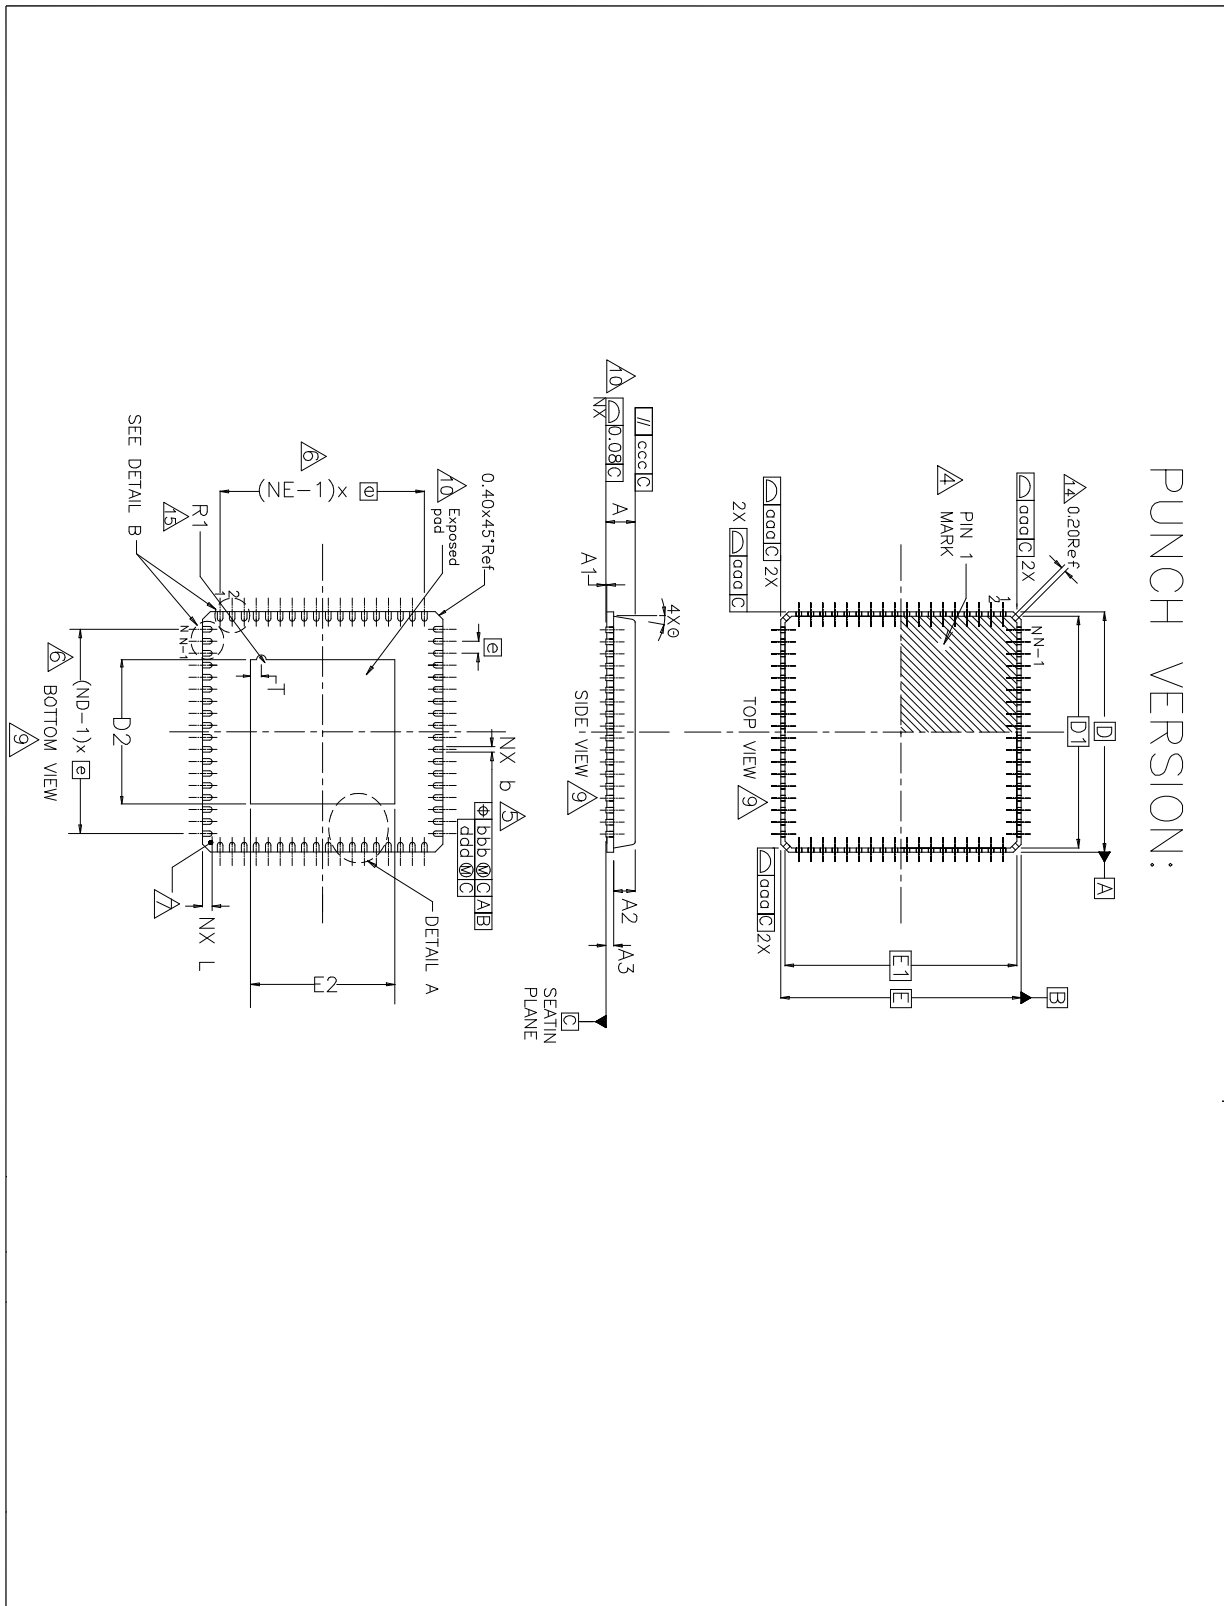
72-Pin QFN Package Dimensions (a) (in Millimeters)
